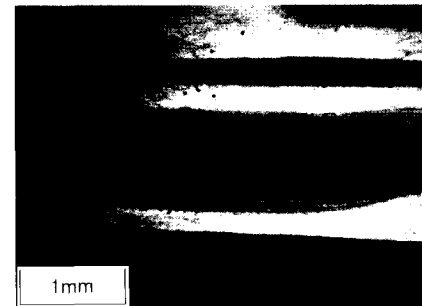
Weld cross section for Experiment 2-4(S)
